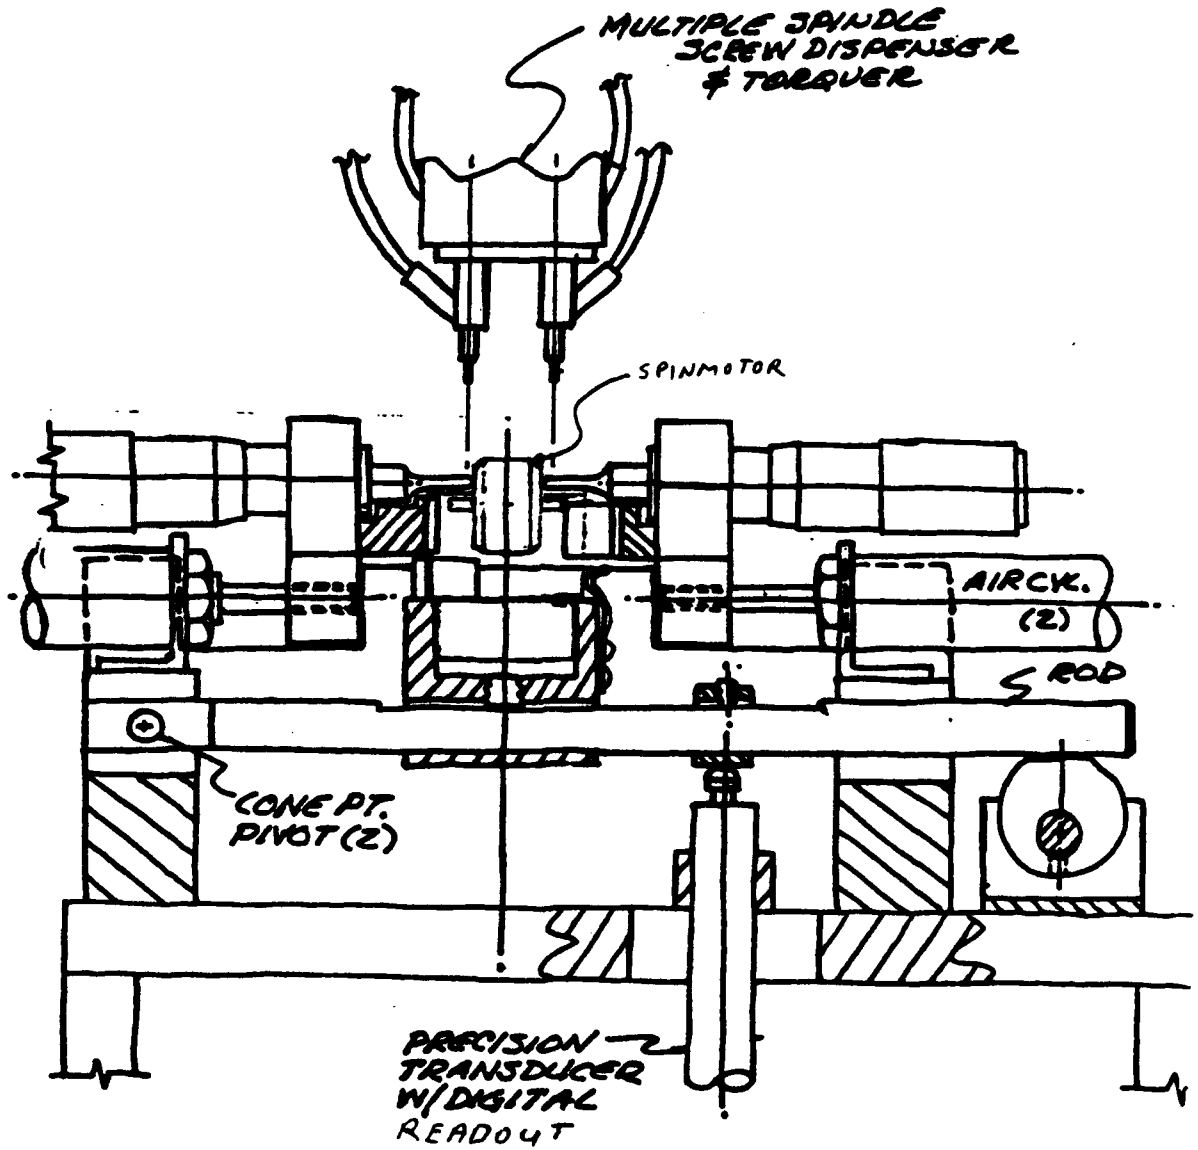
Pre-Balance and Holding Tool (Spinmotor Assembly GG1111 Spinmotor)
